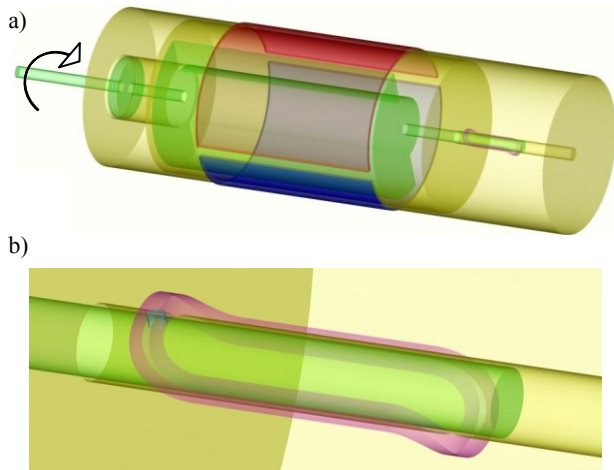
a) View of the engine doing the rotary movement; the piston is pulled out as much as possible, b) view of the cam mechanism; the slider is in the location corresponding to the maximum position of the pulled out piston
